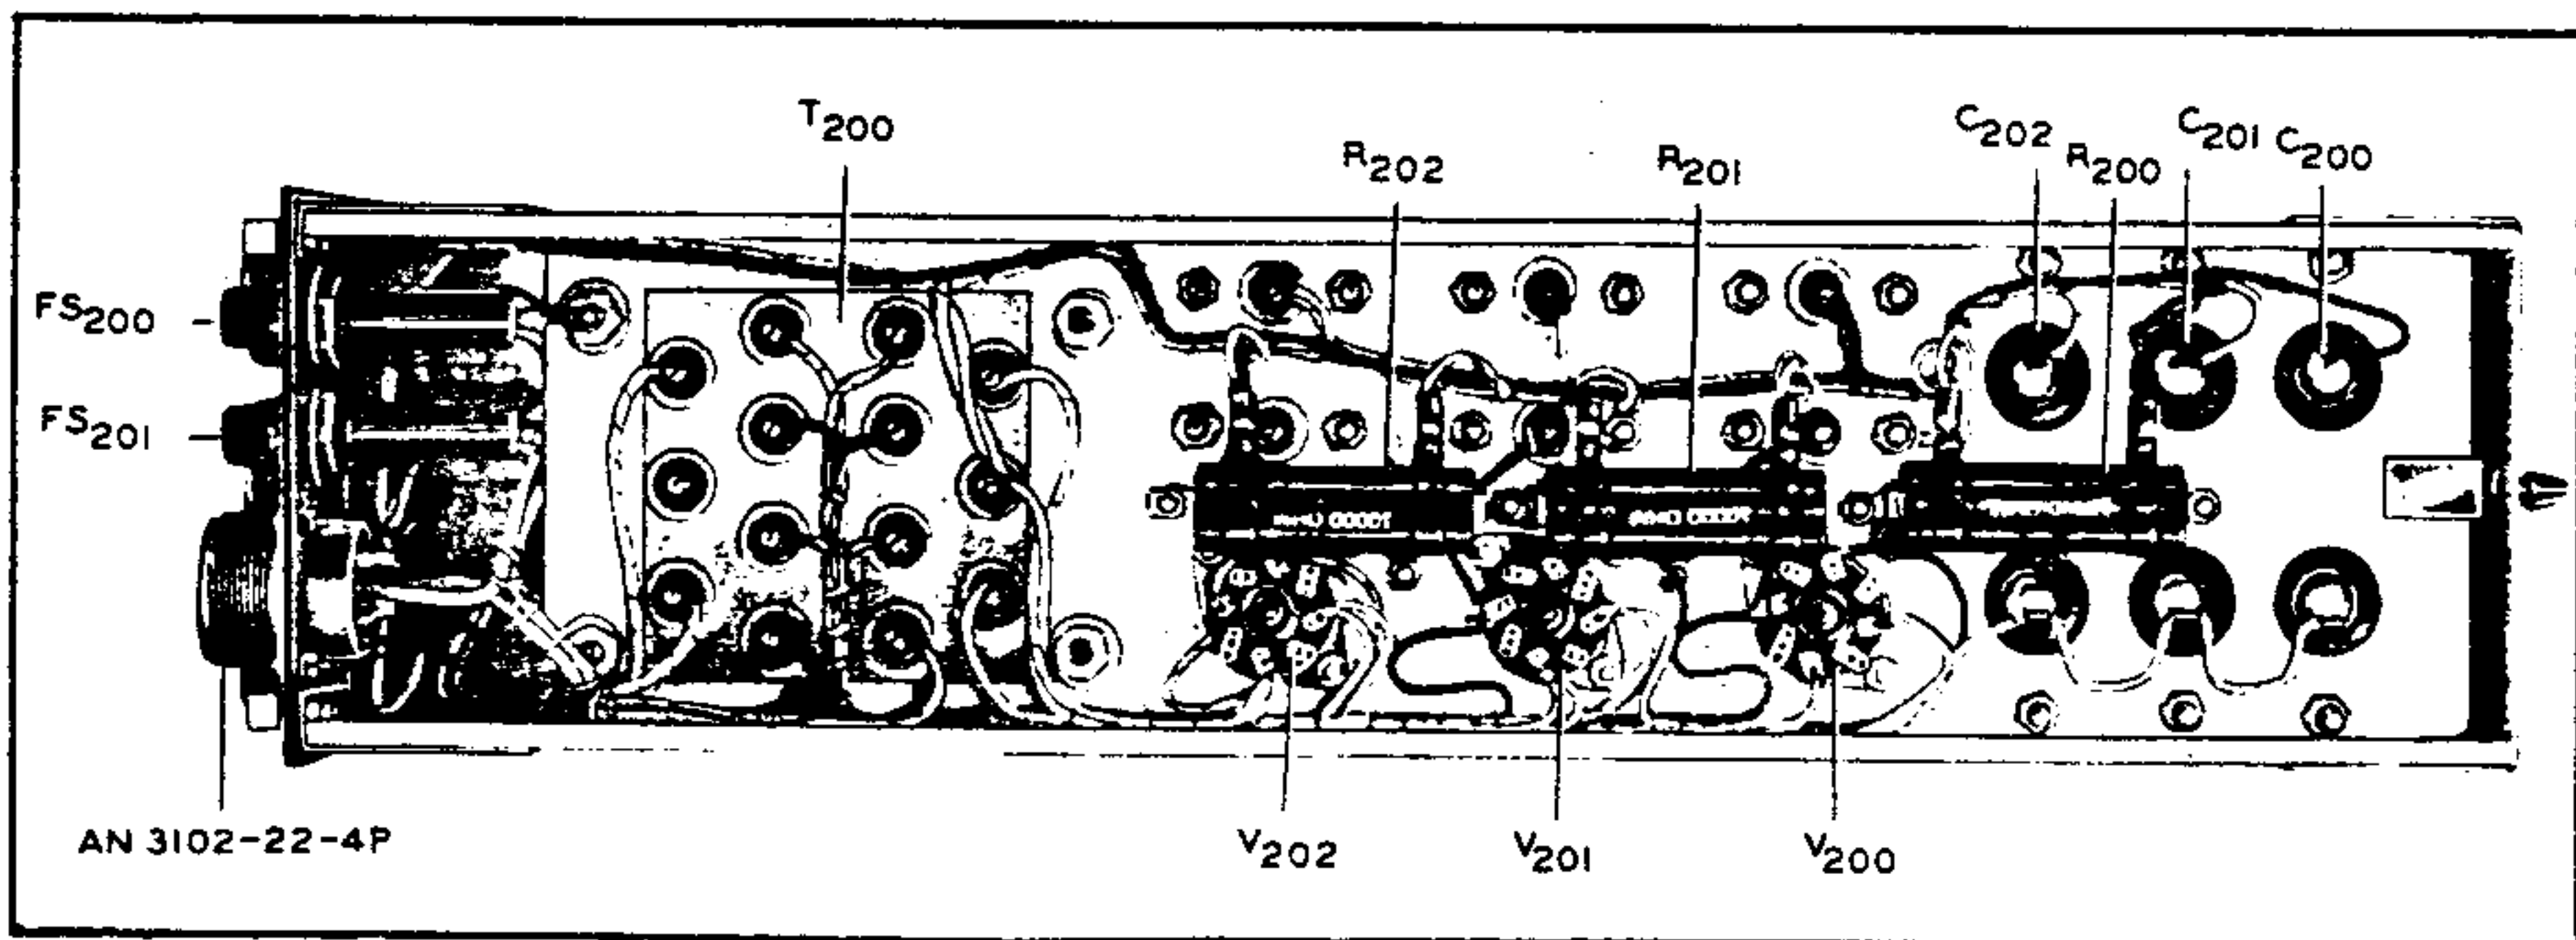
Rectifier Power Unit PP-32/AR — Bottom View
